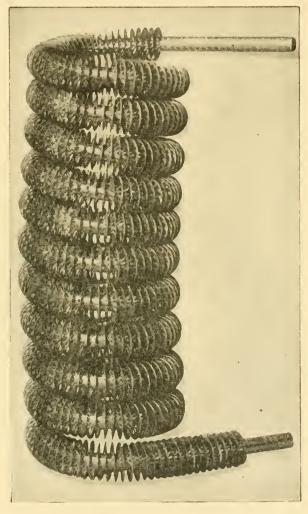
SHOWING HOW SPIRAL FIN TUBE CAN BE SHAPED.
